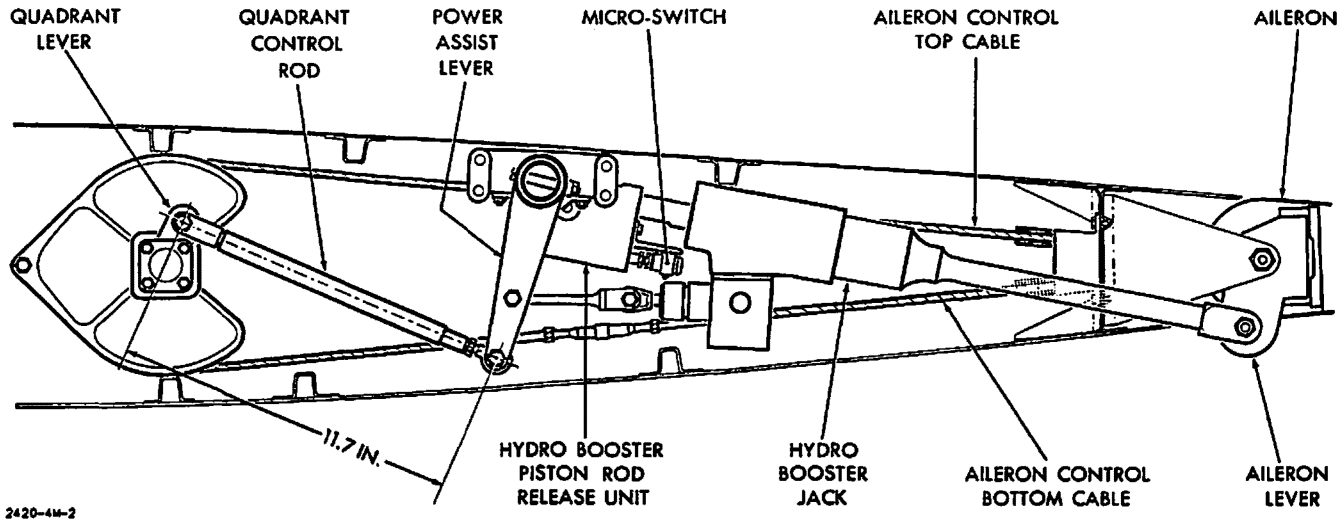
Aileron Controls Rigging Dimensions
